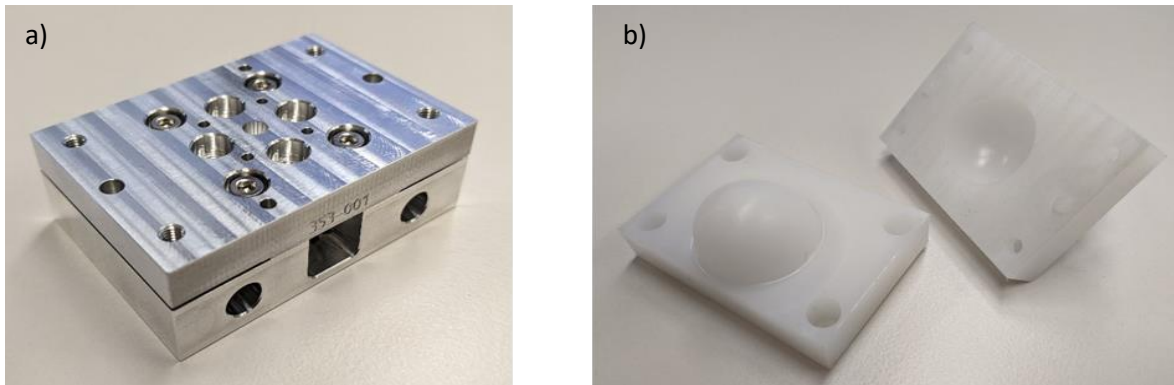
Manufactured horn-package (a) and exemplary HDPE 20 ° tilted lens (b)
